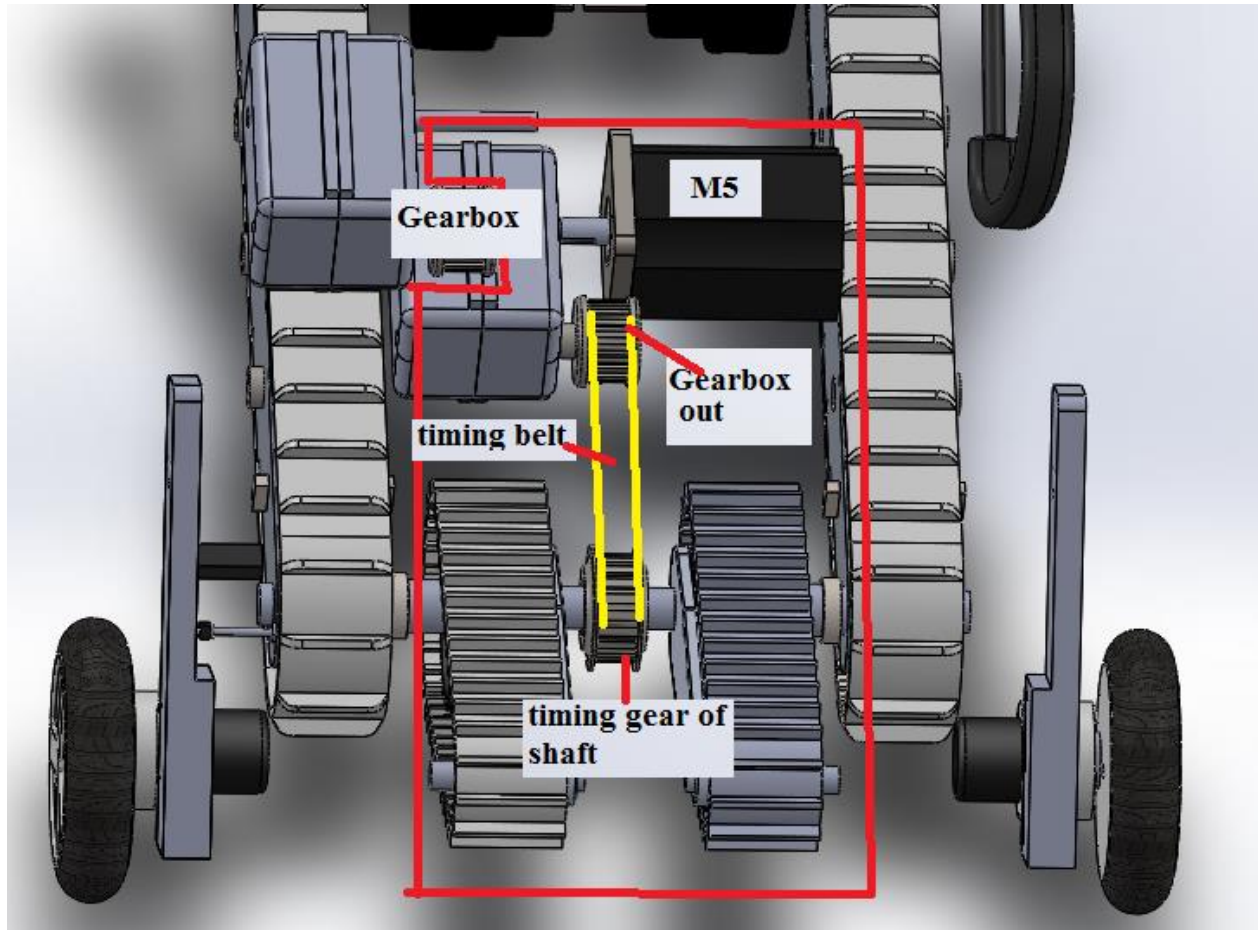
Illustrated of gearbox of rotating rear wheel
